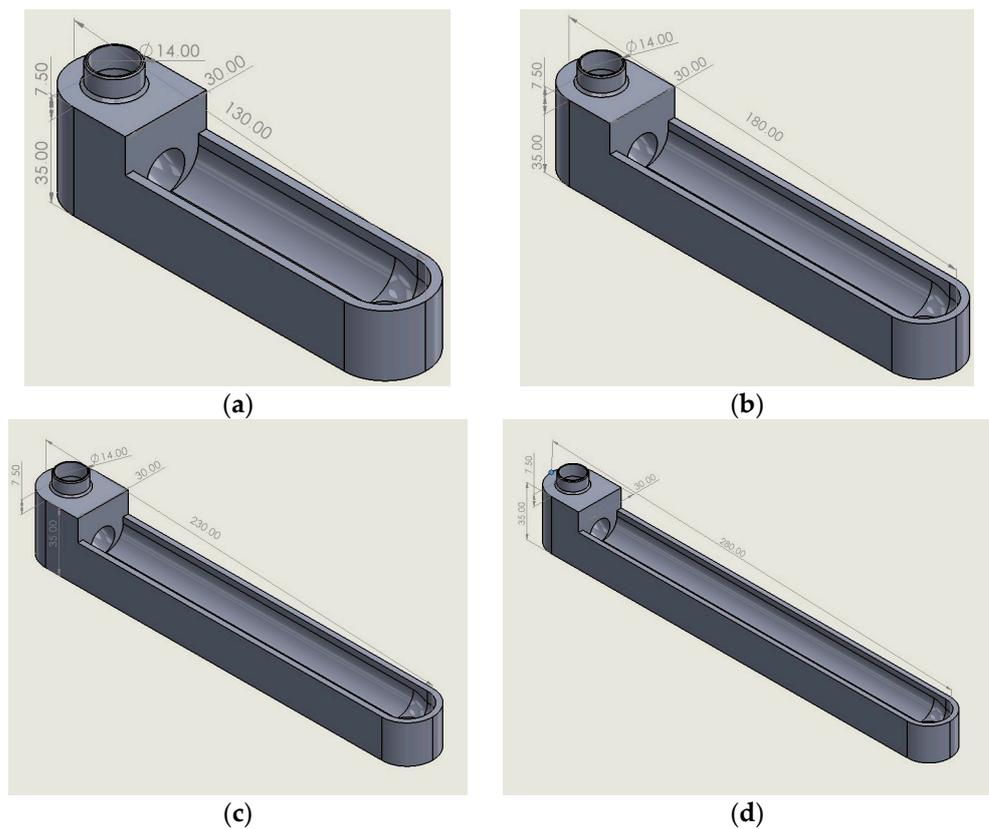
Version 2 of the track sections: (a) track section 2, (b) track section 3, (c) track section 4, and (d) rack section 5.
